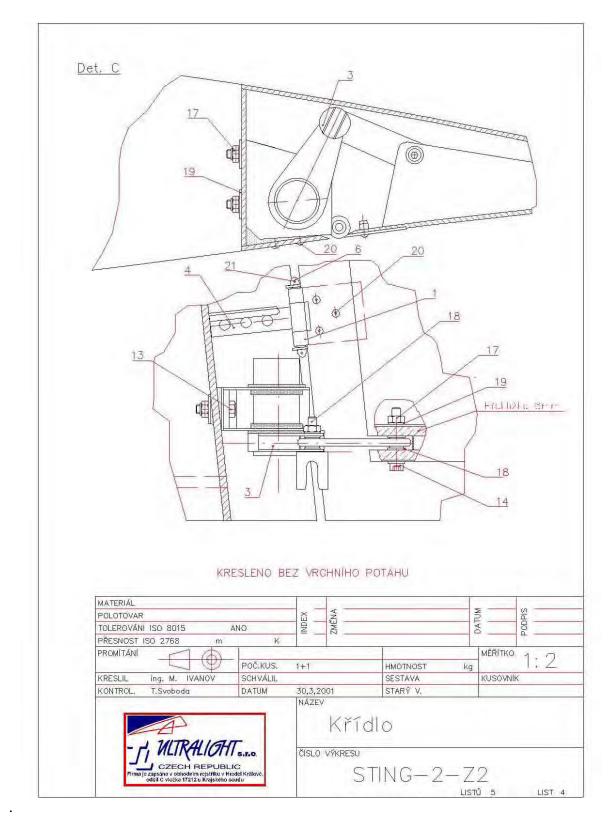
DETAILED PARTS AND PARTS ASSEMBLY DRAWINGS-
